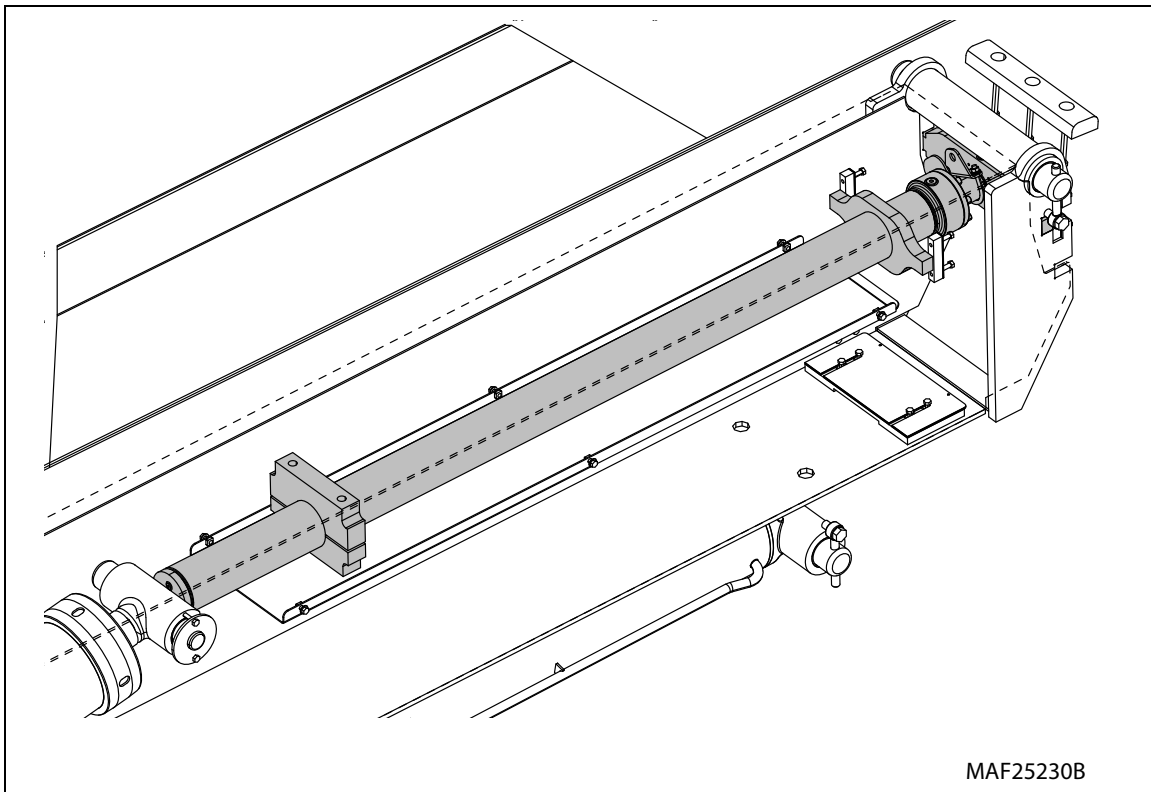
Removal/Installation of Tower Telescope Cylinder
